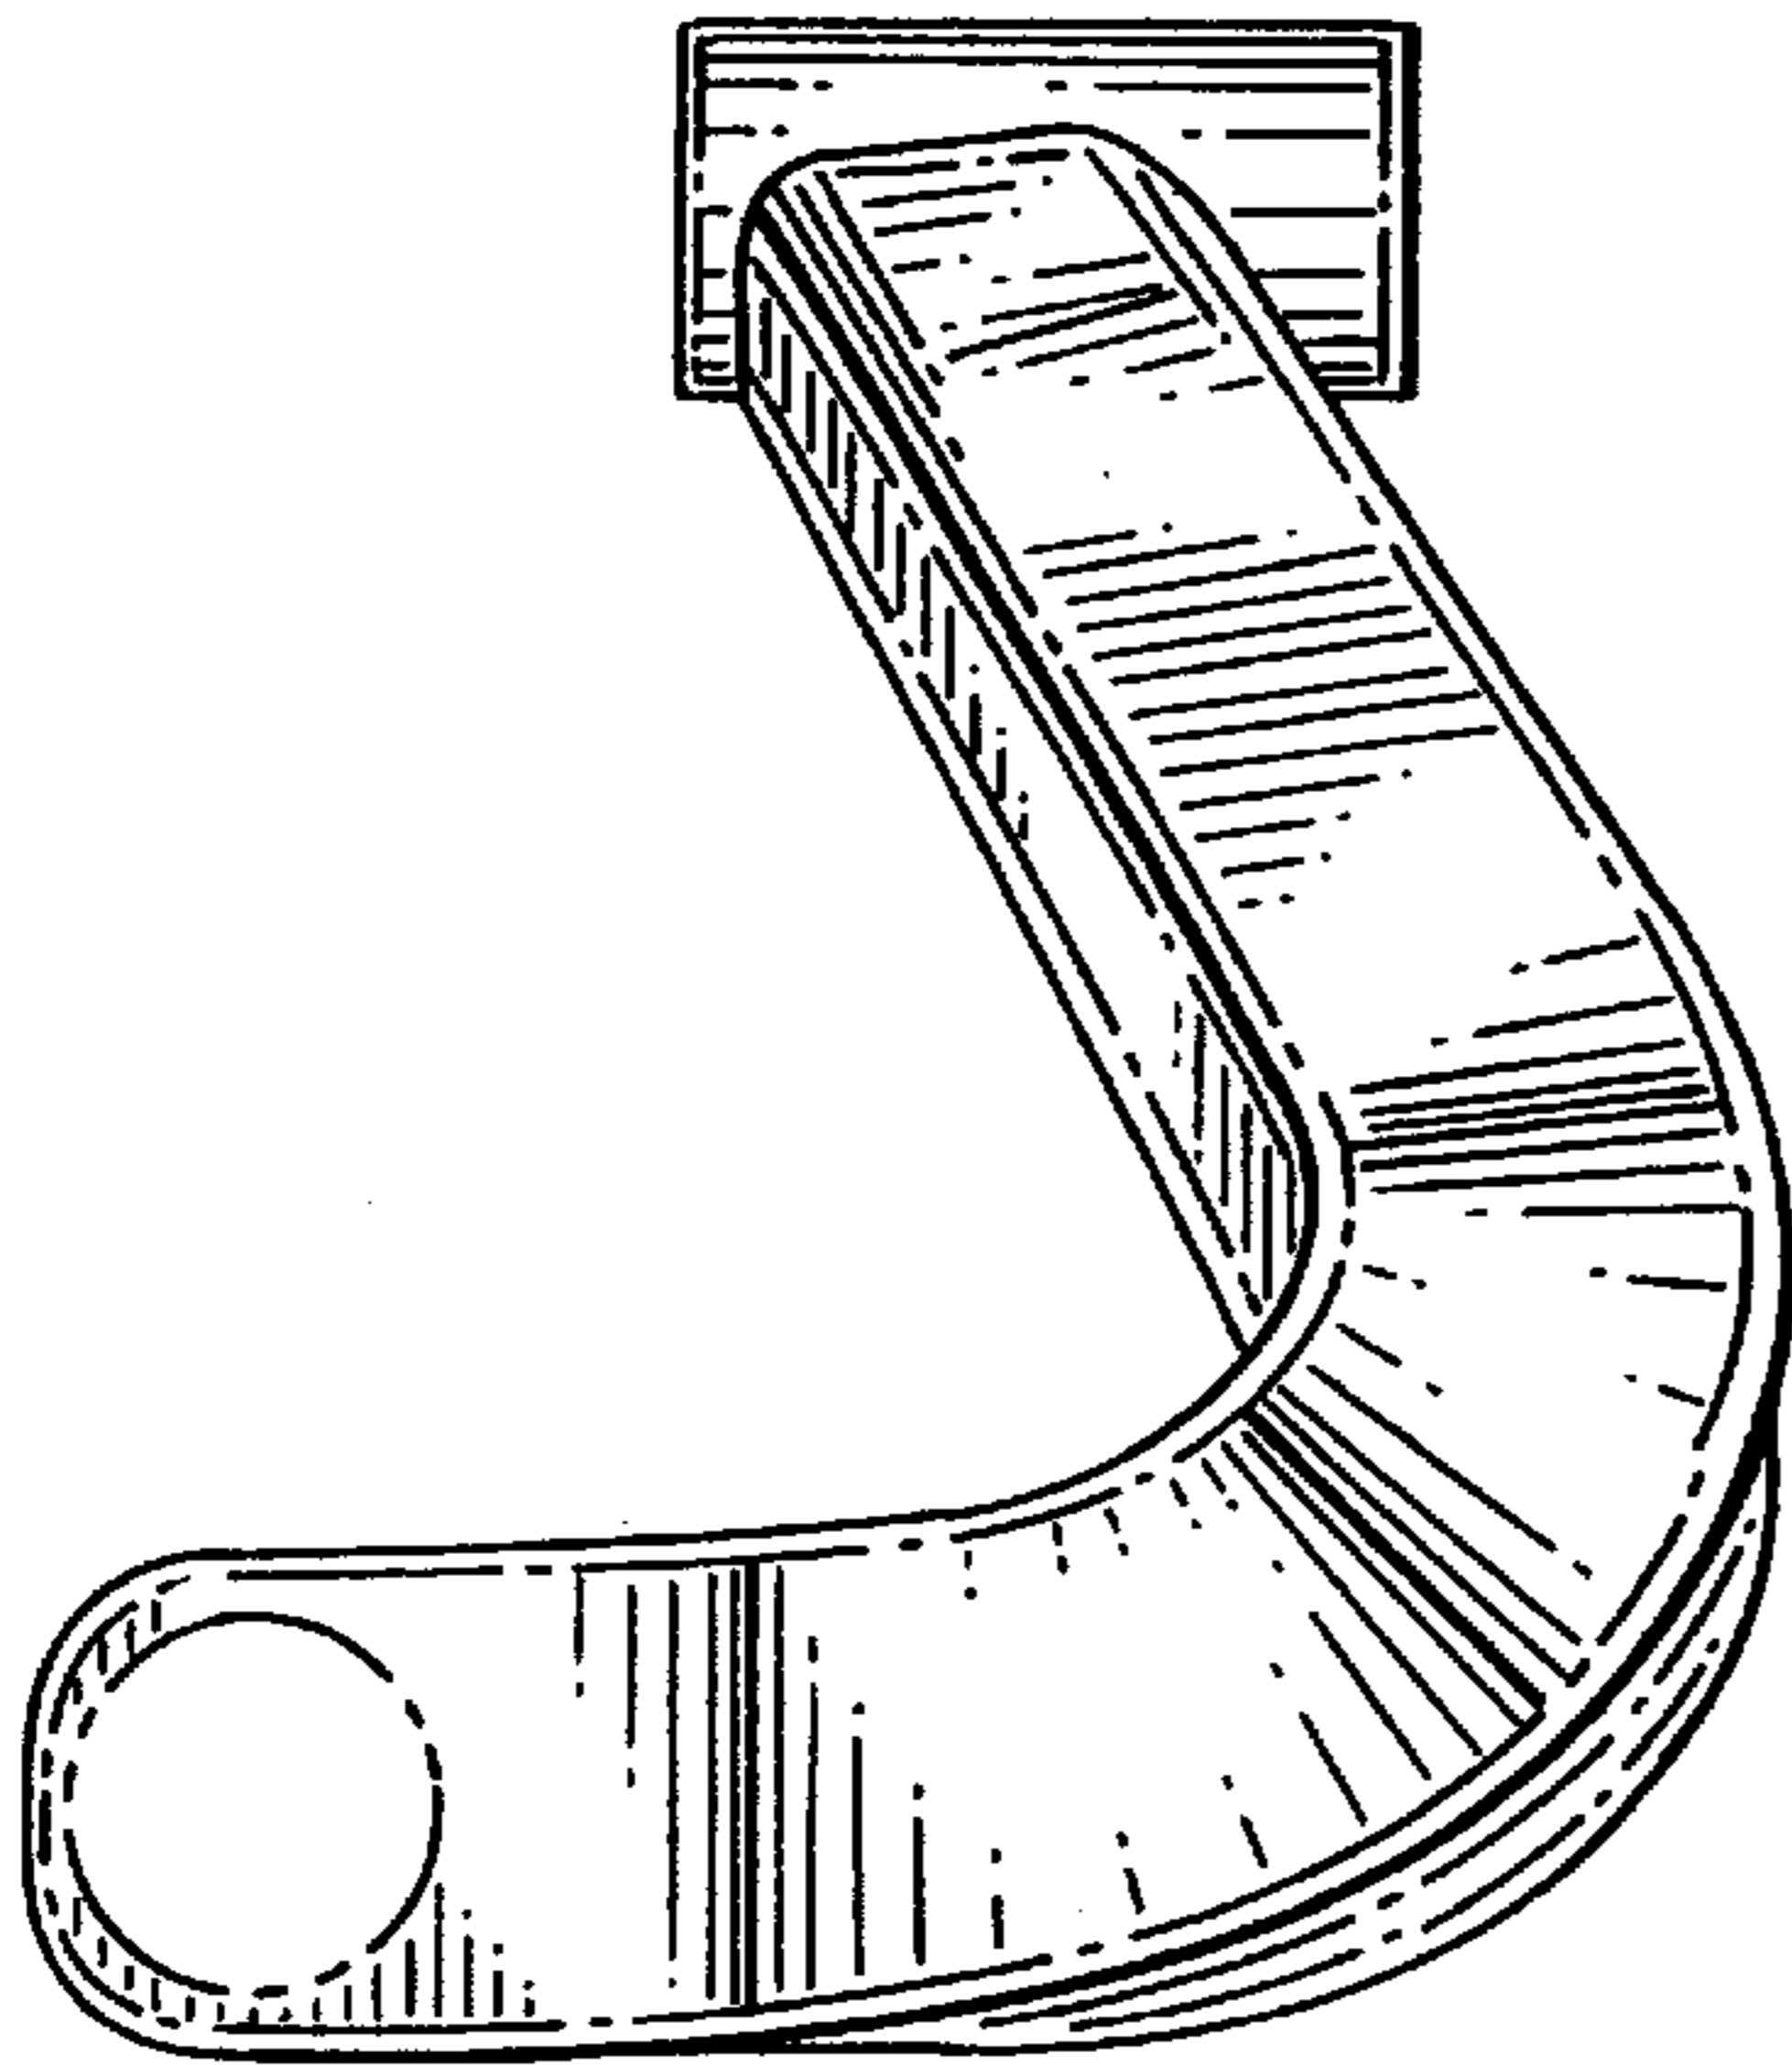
is a bottom view of the lift wheel arm for an implement design of FIG. 1.
